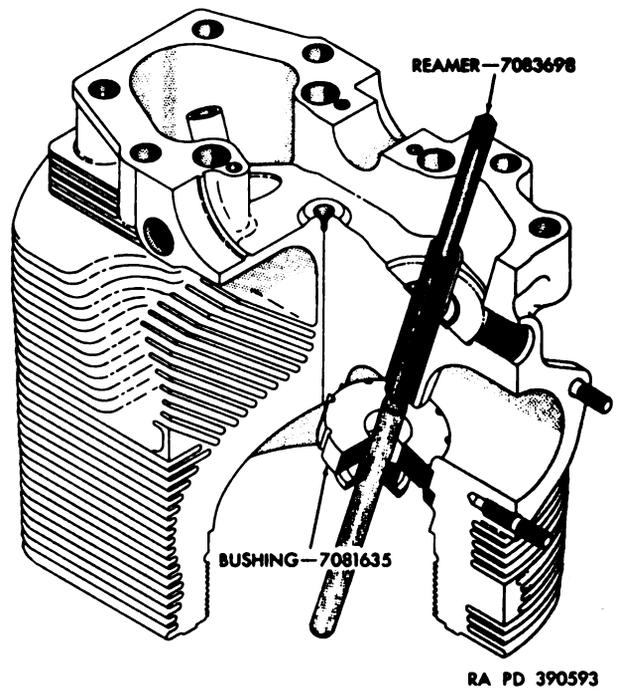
Valve guide reamer and pilot bushing installed—cutaway view.
